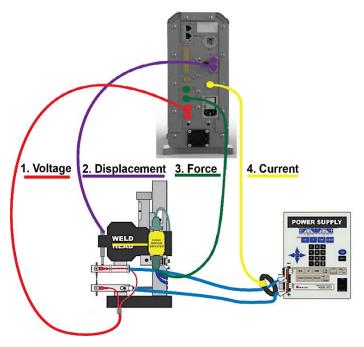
Single Head, Opposed Weld Connectivity
